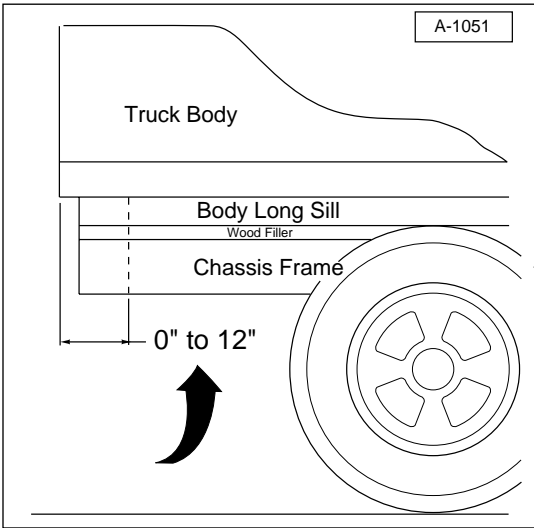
Cut off or extend the body long sill and chassis frame to the dimensions shown in the illustration if the chassis frame is not within the 0 to 12" dimension shown above.
